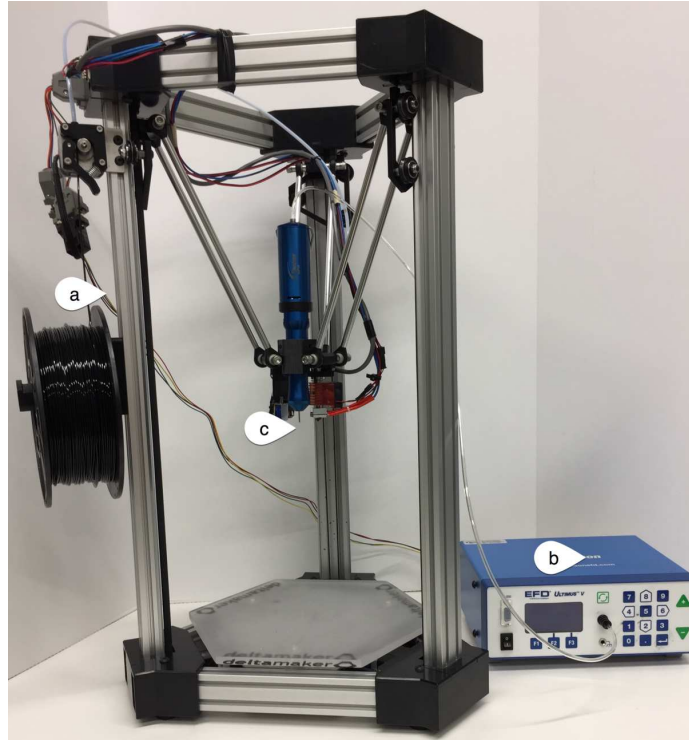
Modified fused filament fabrication delta robot (a) modified fused filament fabrication delta robot, (b) integrated paste extrusion system, (c) polymer paste cartridge, and (d) paste extrusion nozzle. (©Holness and Price (2016), included with permission.)
